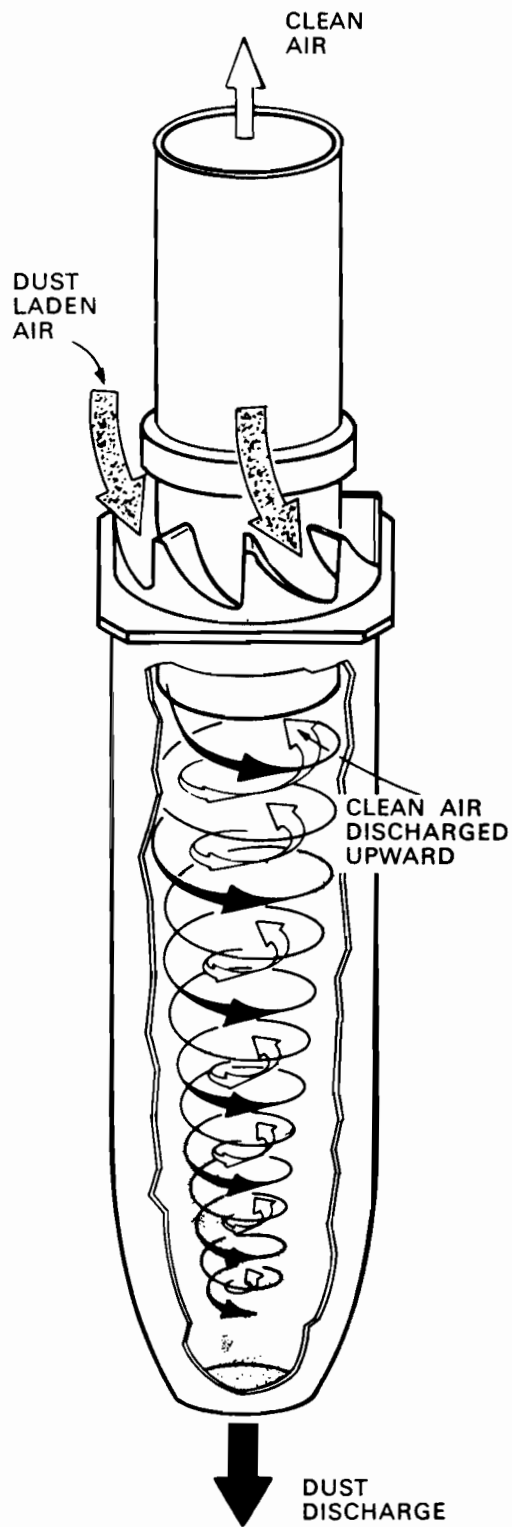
CUTAWAY OF DUST COLLECTOR TUBE.
